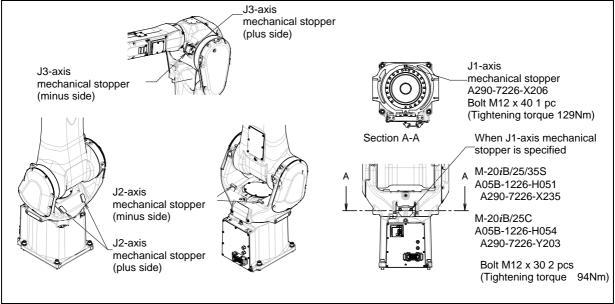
Check of fixed mechanical stopper and adjustable mechanical stopper
